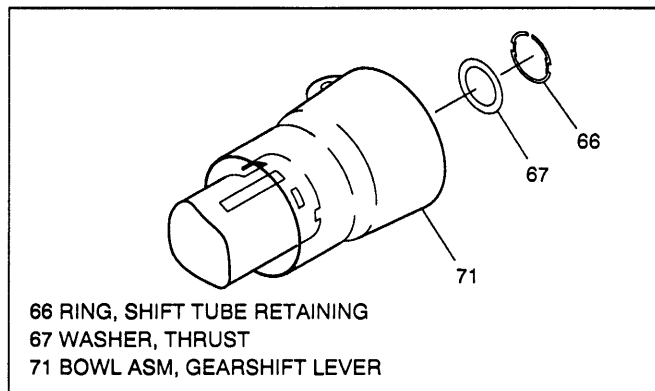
Installing Shift Tube Retaining Ring, Thrust Washer
